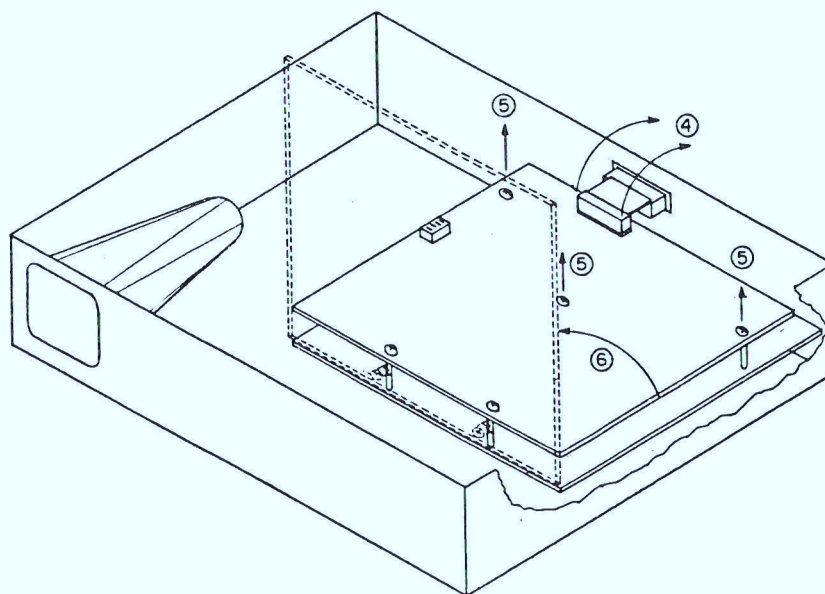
ACCESS TO LOWER CIRCUIT BOARD
